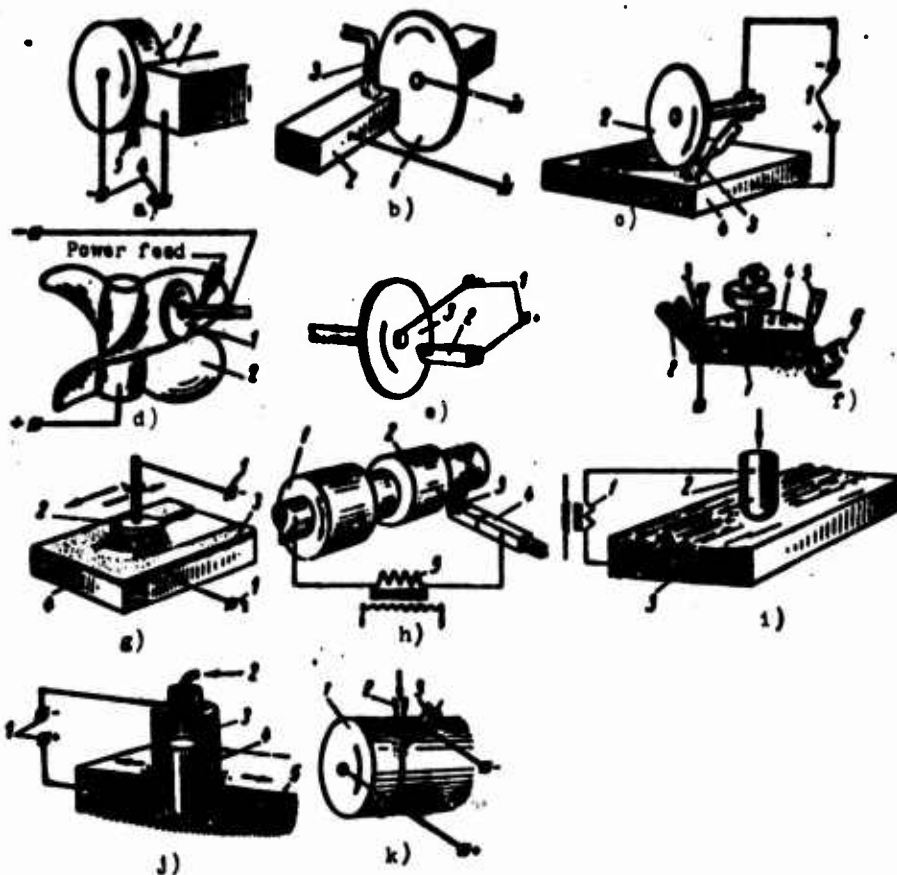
Electric-contact methods of treatment. a) fundamental diagram: 1 - electrode-tool (disk); 2 - blank; 3 - zone of contact heating and melting; 4 - current feed; b) cutting: 1 - cutting disk; 2 - blank; 3 - liquid supply; c) roughing (grinding) flat surfaces: 1 - current feed; 2 - grinding disk; 3 - supply of liquid; 4 - processed part; d) roughing (grinding) shaped parts: 1 - grinding disk; 2 - surface of part; e) sharpening tools: 1 - current feed; 2 - sharpening cutter; 3 - sharpening wheel; f) polishing balls: 1 - bottom disk-electrode; 2 - groove for supply of balls; 3 - polished balls; 4 - top disk-electrode; 5 - water supply; 6 - ball exit; g) scale cleaning: 1 - current feed; 2 - wire brush-electrode; 3 - layer of scale on part; 4 - part; h) sharpening: 1 - clamping chuck; 2 - turned surface; 3 - cutter; 4 - cutter holder water-cooled; 5 - step-down transformer; i) smoothing: 1 - step-down transformer; 2 - smoothing electrode (cutter); 3 - smoothed blank; j) drilling (reaming): 1 - current feed; 2 - oil or water supply; 3 - cutting tube-electrode; 4 - cut part of blank; 5 - part; k) vibration-contact hard facing: 1 - part; 2 - liquid supply; 3 - supply of hard-facing wire.
